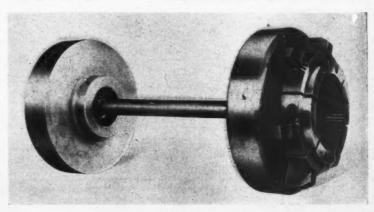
Special diaphragm chuck for gripping rings in which internal helical gear teeth are to be cut
